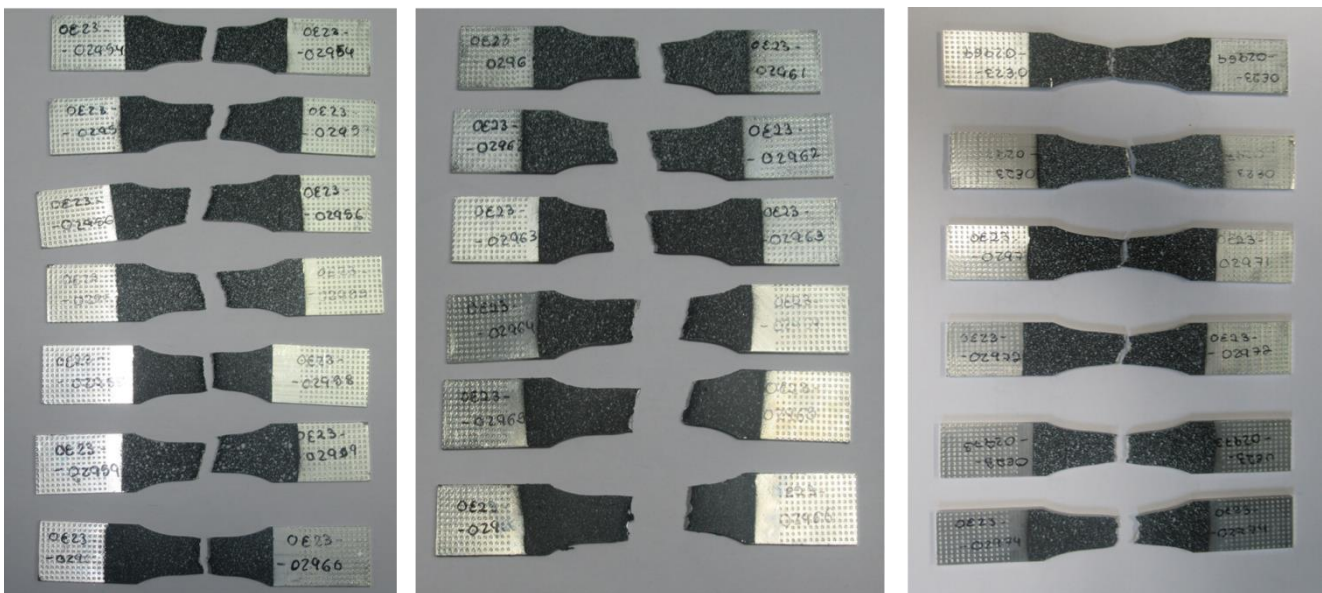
Specimens after QS mini-tensile test. Left: 0° coupons; Center: 45° coupons; Right: 90° coupons.
